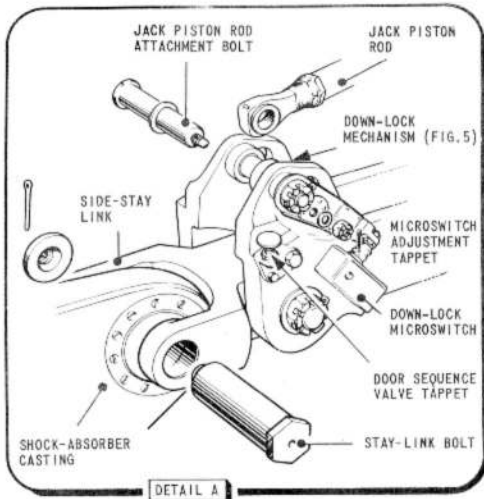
UNDERCARRIAGE REMOVAL AND ASSEMBLY
